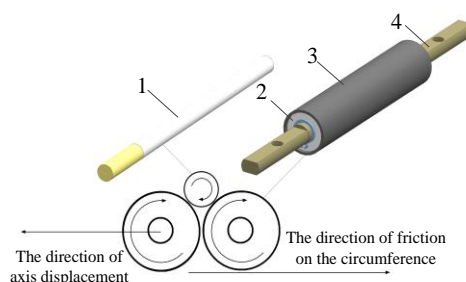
Schematic diagram of roller slewing mechanism; 1: cigarette; 2: bearing; 3: roller; 4: rotating shaft.
